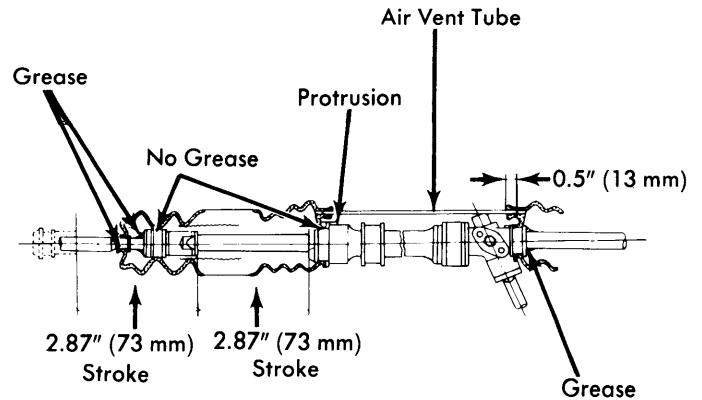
View Showing Operation Checks and Lubrication of Steering Gear Assembly
